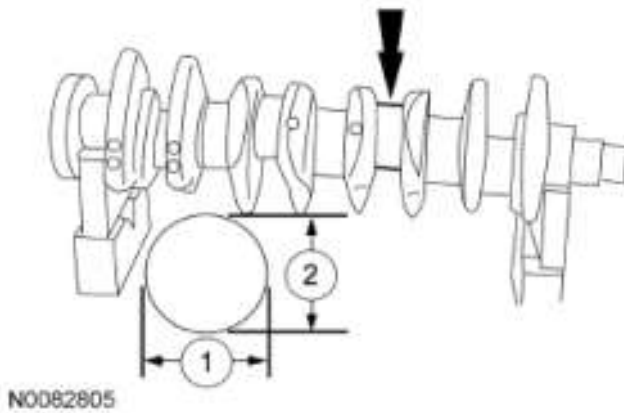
Measuring Crankshaft Connecting Rod Bearing Journal Diameters
